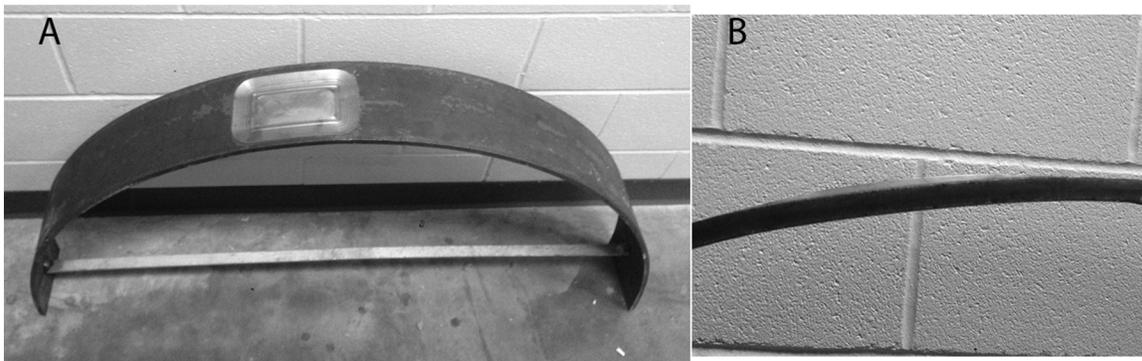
Images of the machined section after rolling. Image A shows the complete specimen and image B shows a close up indicating little deformation. Note: plate will be wider in final design.
